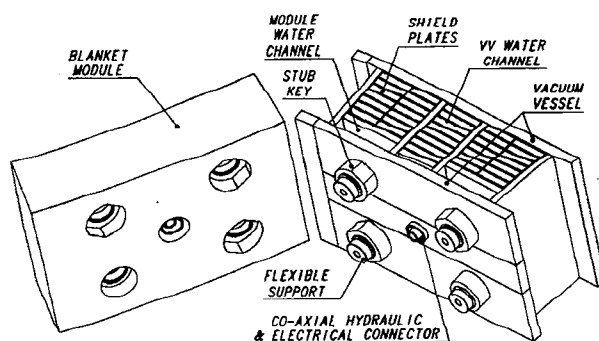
Blanket Module Attachment by Stub Keys (Type 1)
